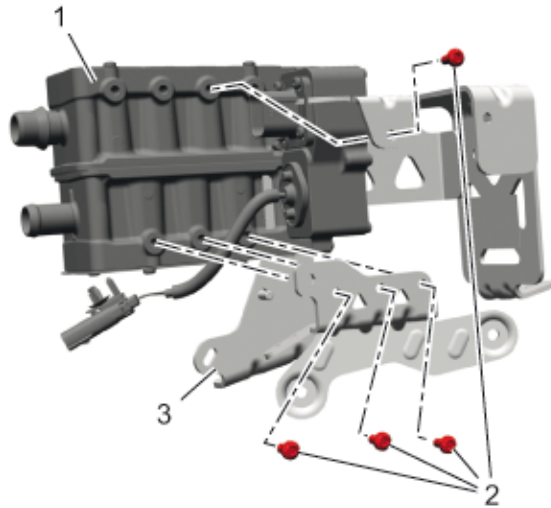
Heater Coolant Heater, Bracket And Bolts
